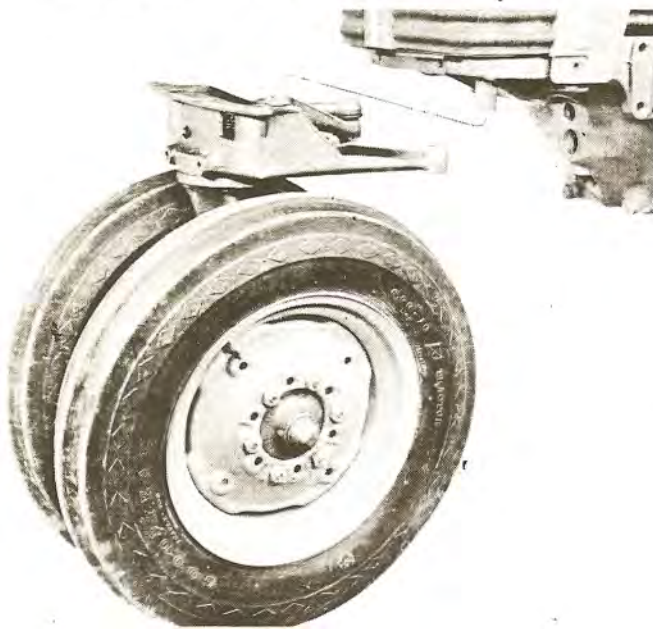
Removing Twin Front Wheel Axle Assembly
